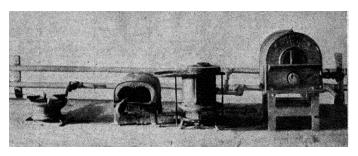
Furnaces mounted on brick-top table. Solid flame burner; soldering copper furnace; melting furnace; enameling furnace.
